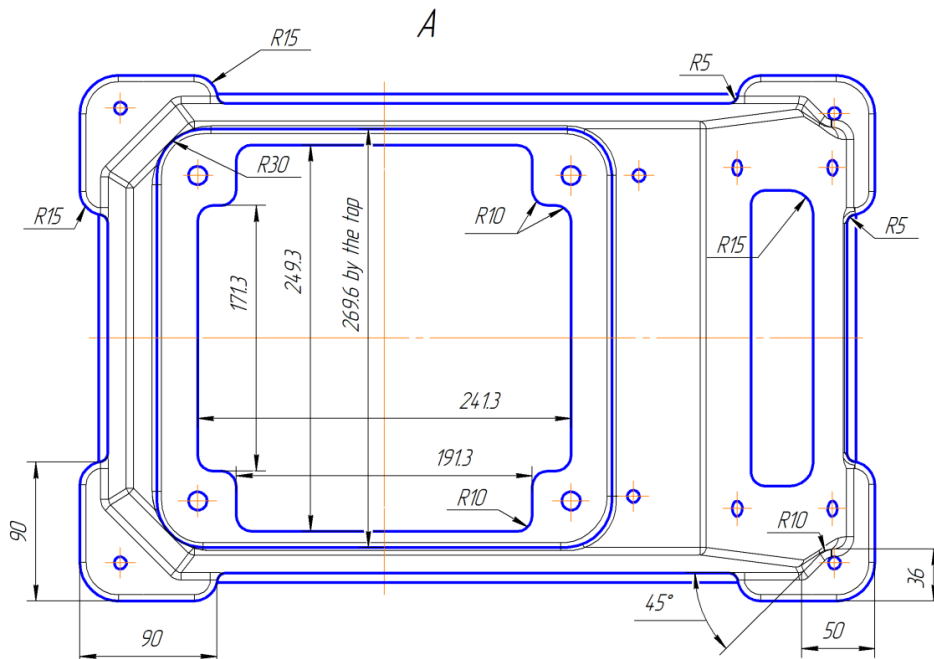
The drawing of the part «Frame of the terminal box 5AMN 315». View A.
